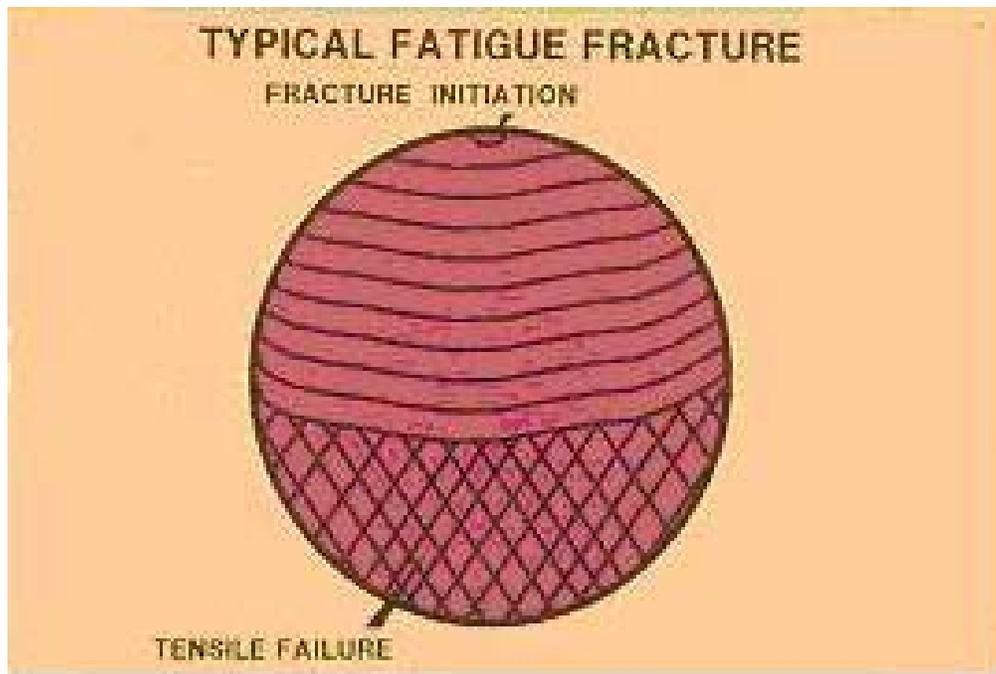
Schematic of a fatigue fracture surface showing “beach marks”.
